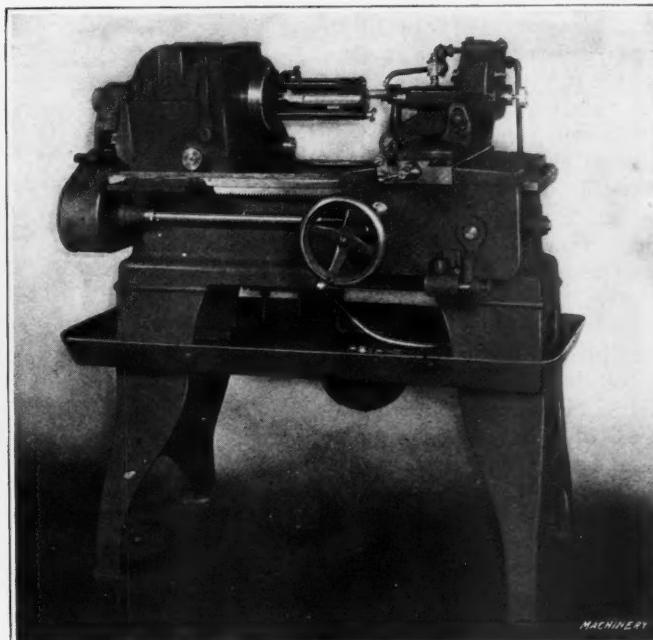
Reed-Prentice Thread Milling Machine arranged for Internal Work
